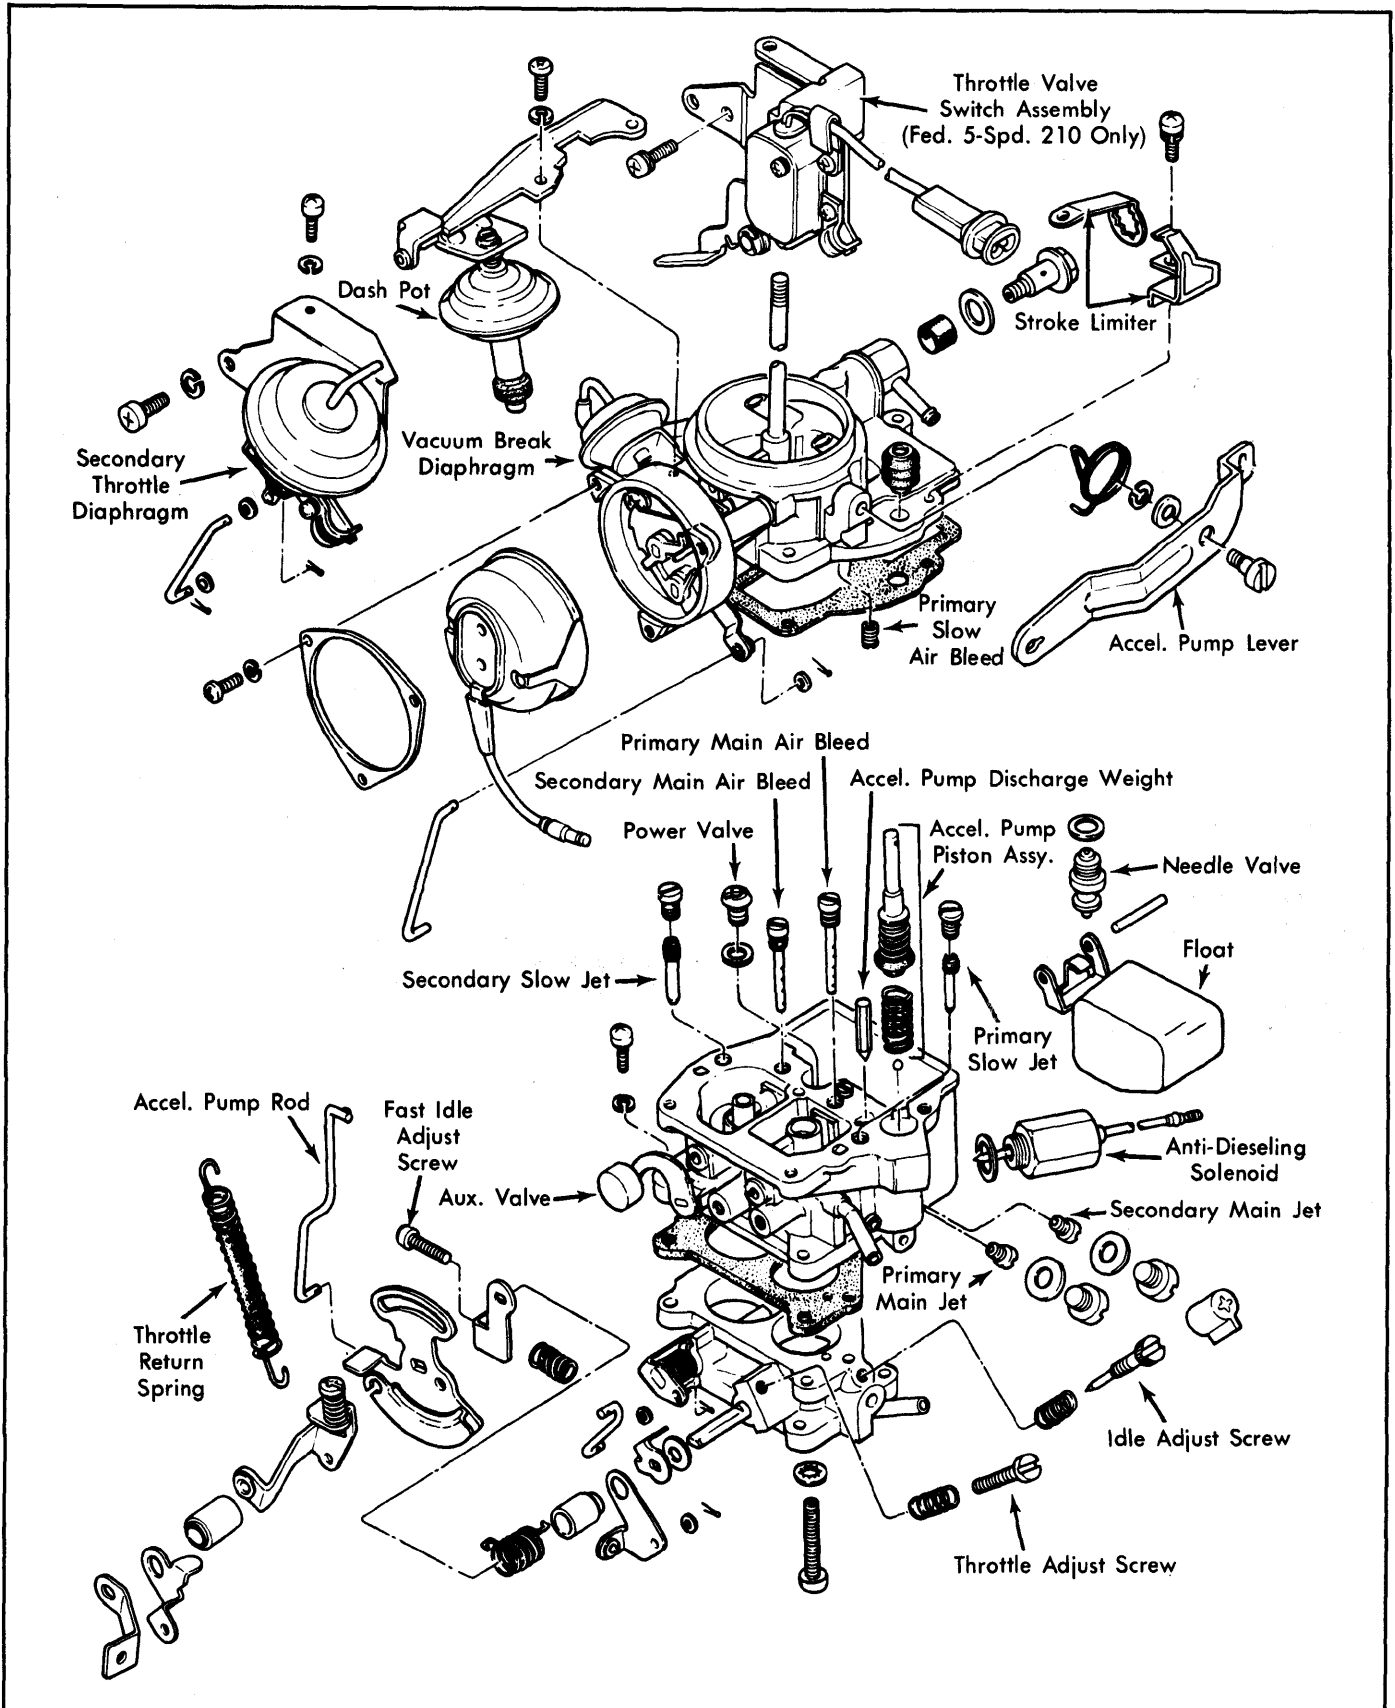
Exploded View of Typical Hitachi 2-Barrel Carburetor (Datsun)
